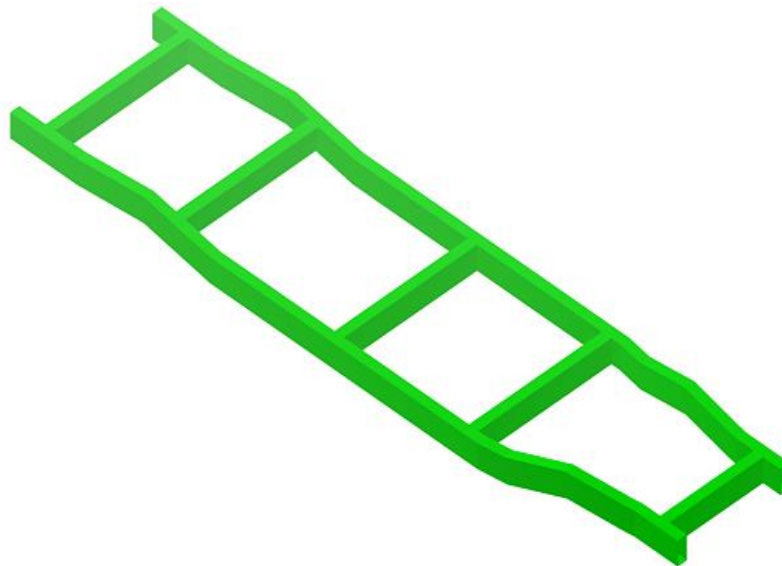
Three-D realistic material of chassis frame for hollow rectangular section
